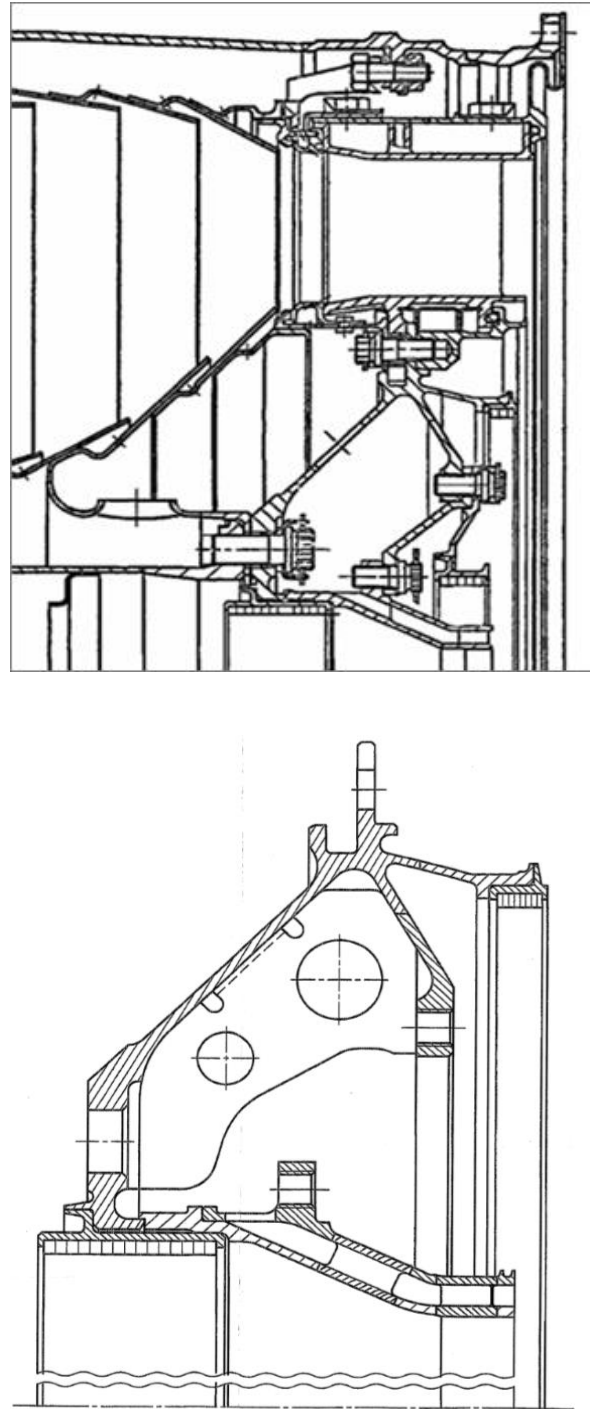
Module design, including components of the combustion chamber and of the turbofan turbine nozzle vanes: at the top - the original design of the module; bottom – assembly of ring bearing blocks
